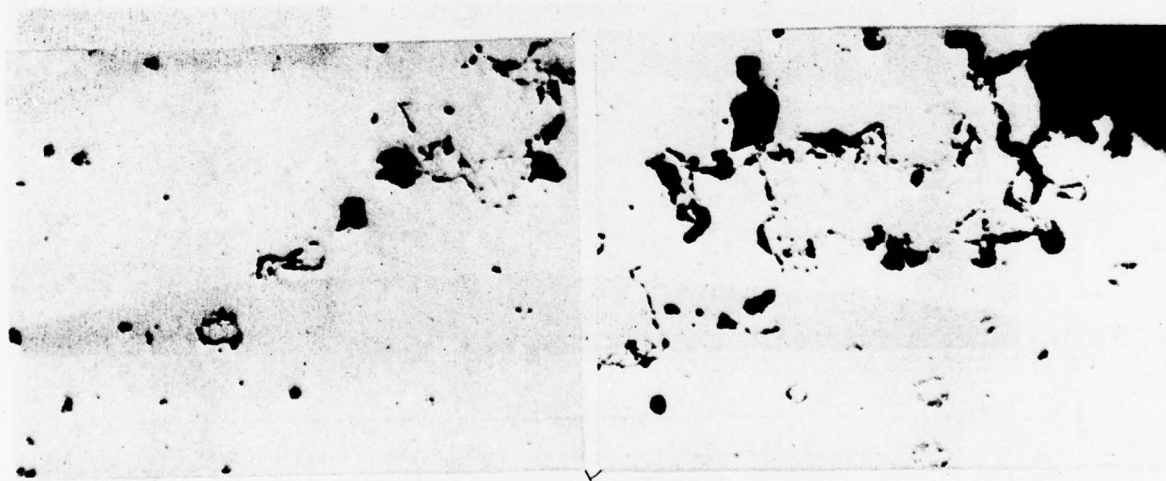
CROSS SECTION OF PITTED AREA NEAR DOME TO OUTLET FITTING BOND OF TANK NO. 5 INTERIOR SURFACE.
